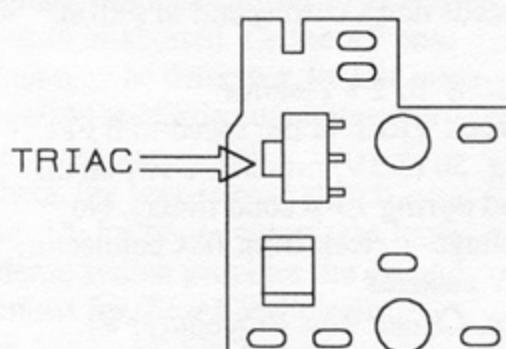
THYRISTOR TRIGGER BASE PLATE
